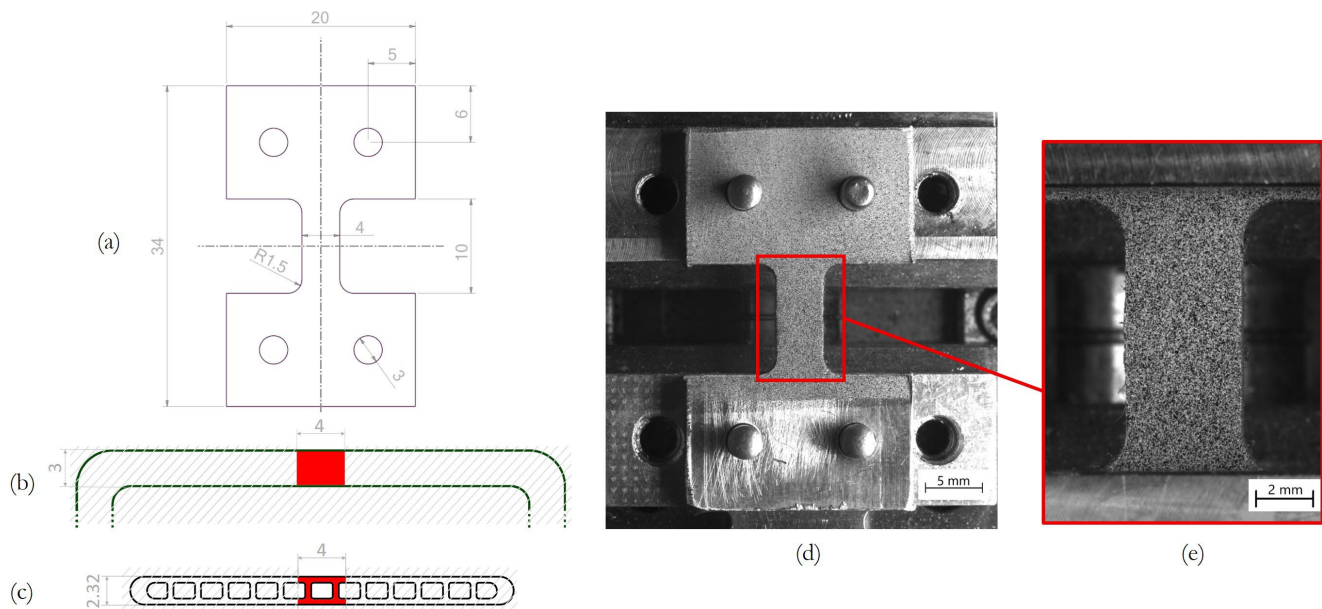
(a) Tensile specimen geometry (dimensions in millimetres). (b) Cross-sectional geometry of the gauge section of the specimen (highlighted in red) extracted from the header. (c) Cross-sectional geometry of the gauge section of the longitudinal specimen (highlighted in red) extracted from the MPE tube. (d) Tensile specimen positioned in the microtesting stage prior to loading. (e) Example of speckle pattern applied to the specimen surface for DIC analysis.
